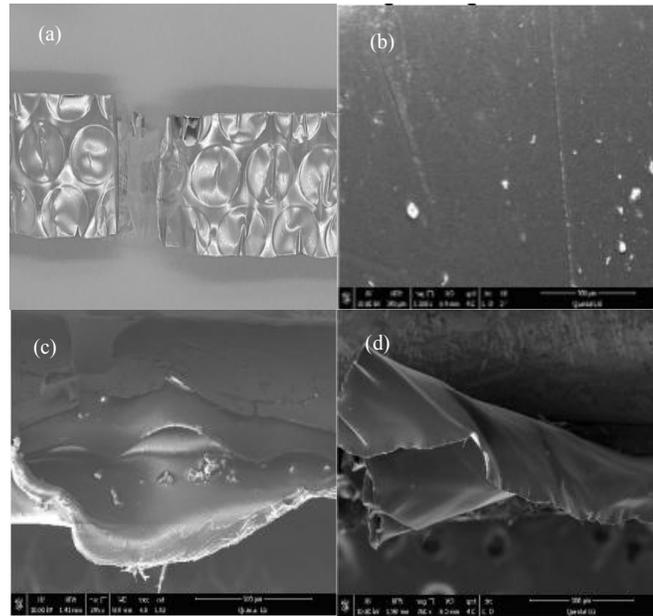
Aluminum foil/bubble composites: (a) samples after tensile test; (b) the surface of the laminate before tensile test; (c) Al foil; (d) PE bubble.
